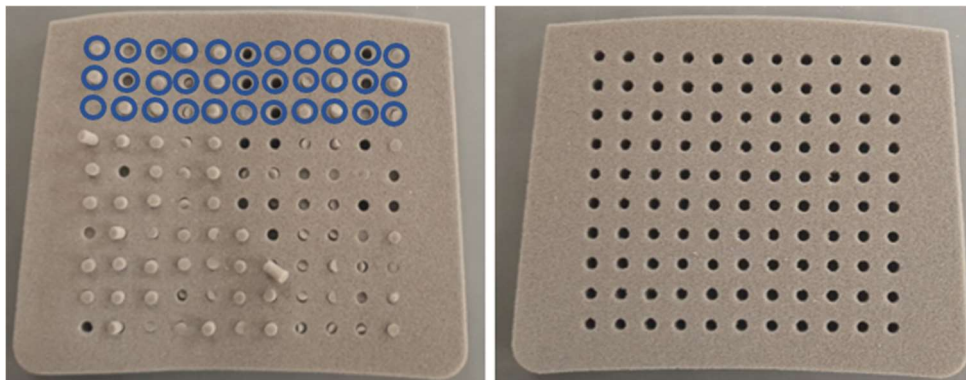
Piece after press cutting with drills circled in blue on the left. Piece after having the drills removed on the right.
